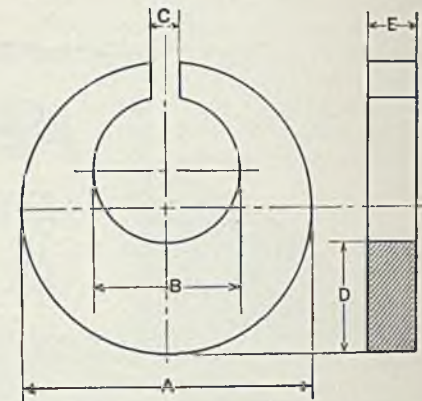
Dimensions checked in distortion tests and shape of sample employed
